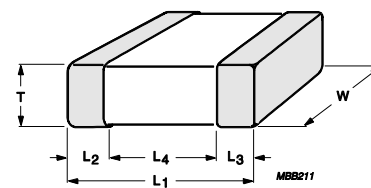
Surface mounted multilayer ceramic capacitor dimension
